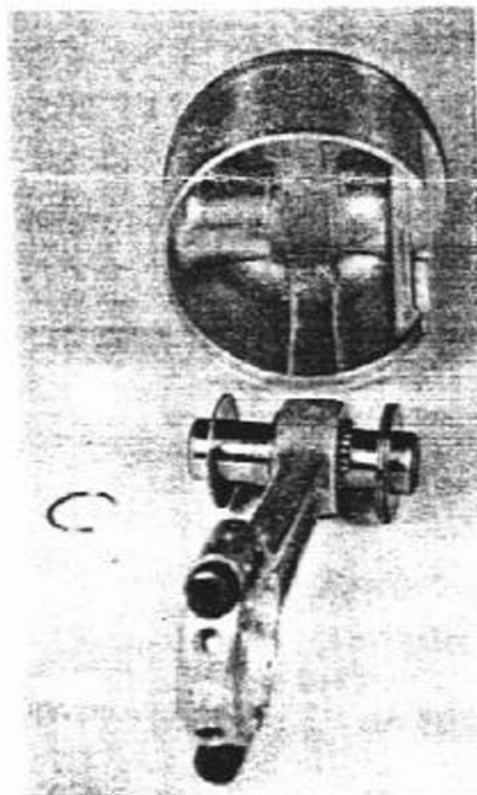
Piston and rod ready for assembly. The bearing arrangement will run many hours.
